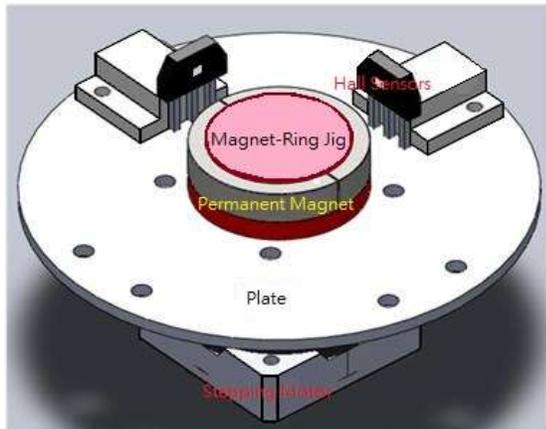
Schematic view of the Angular Position Device containing Two Semi-Ring Shaped Magnets, connected with Attractive Poles and Double Linear Hall Sensors.
